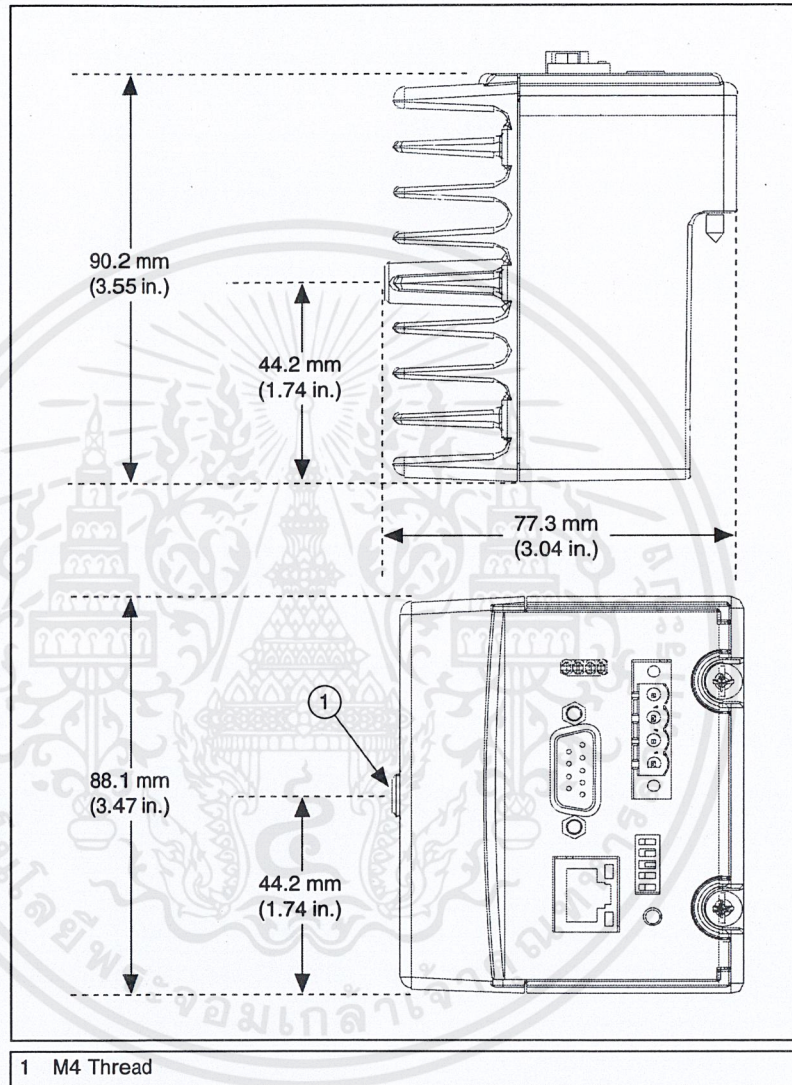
CompactRIO Controller, Front and Bottom Views with Dimensions
